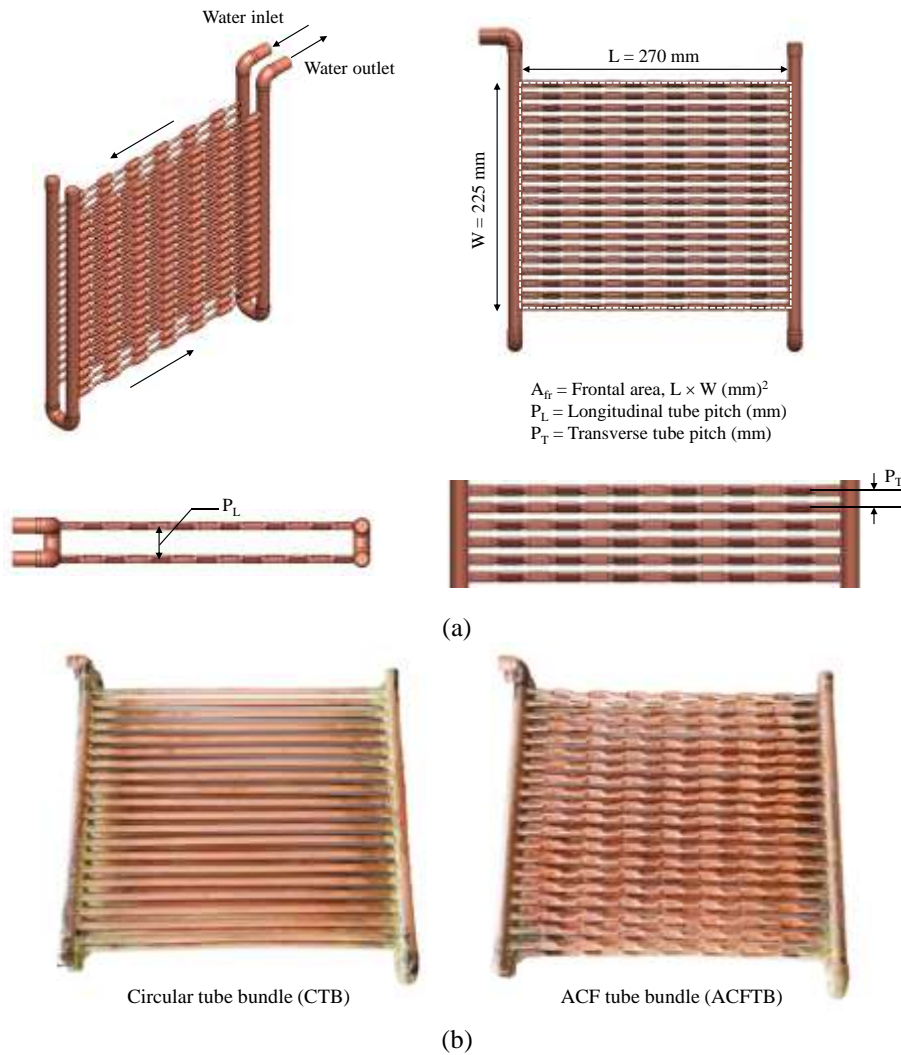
Geometric details of the test tube bundles: (a) dimension details of the test section and (b) photograph of the test sections
